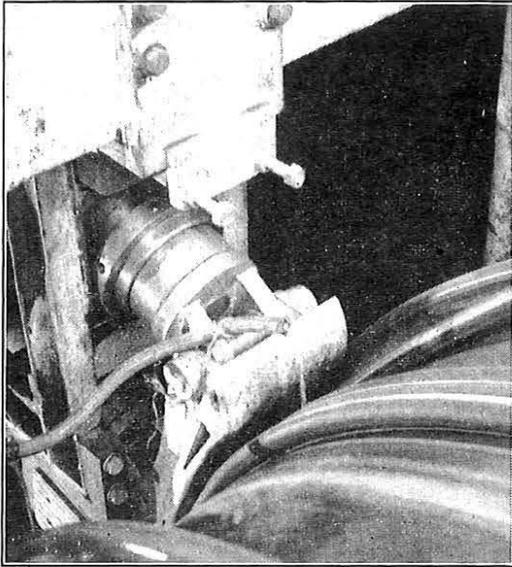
IRONING BOARD ON FORWARD PORT DRUM.
